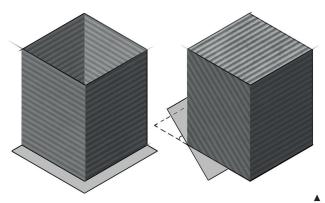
Printing Direction/ Printing in a horizontal or in a 45° angled plane.
